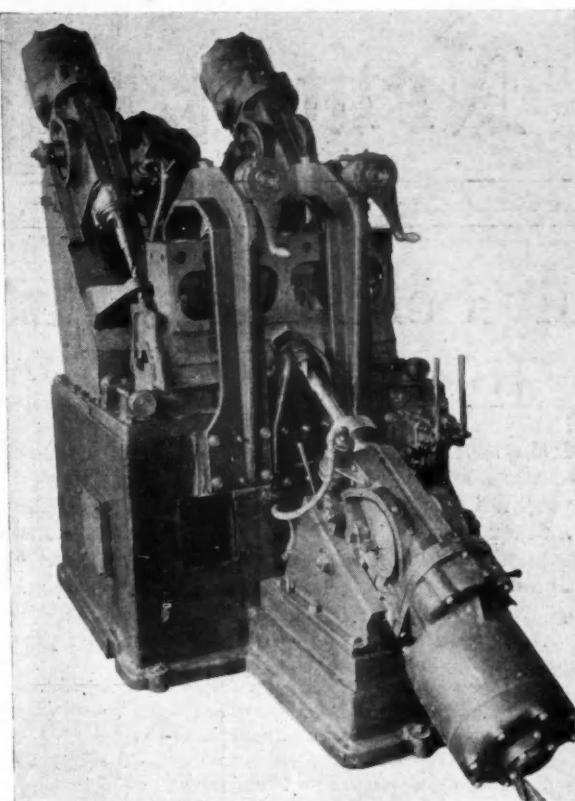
Another view of the Millholland units showing cylinder block in place for drilling
